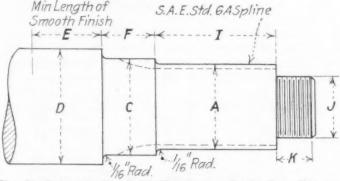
PROPELLER SHAFT FOR USE WITH A SPLINE REAR END OF FRONT SHAFT
